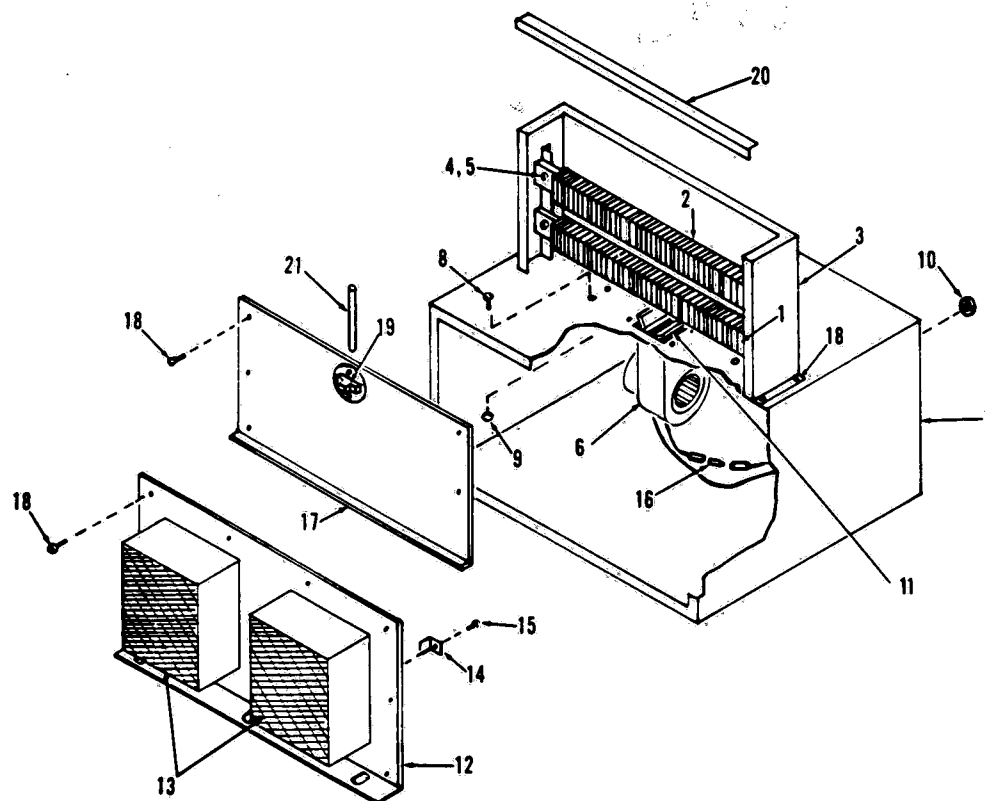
HEATER, FAN AND FILTER ASSEMBLY, Medium Aerator
